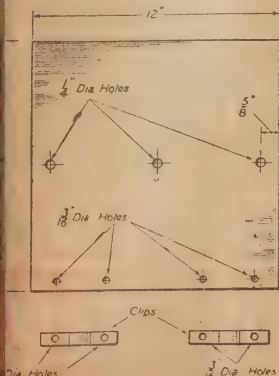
The reflector plate drilled for the fitting of heating cone and flame guard, and also showing fixing clips.
